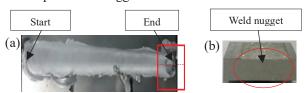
Weld surface when welded at (a) parameter 3 and (b) weld nugget
